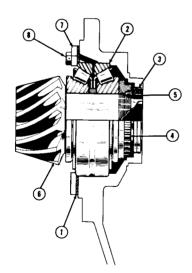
TRANSMISSION ADAPTOR, CROSS SECTION
